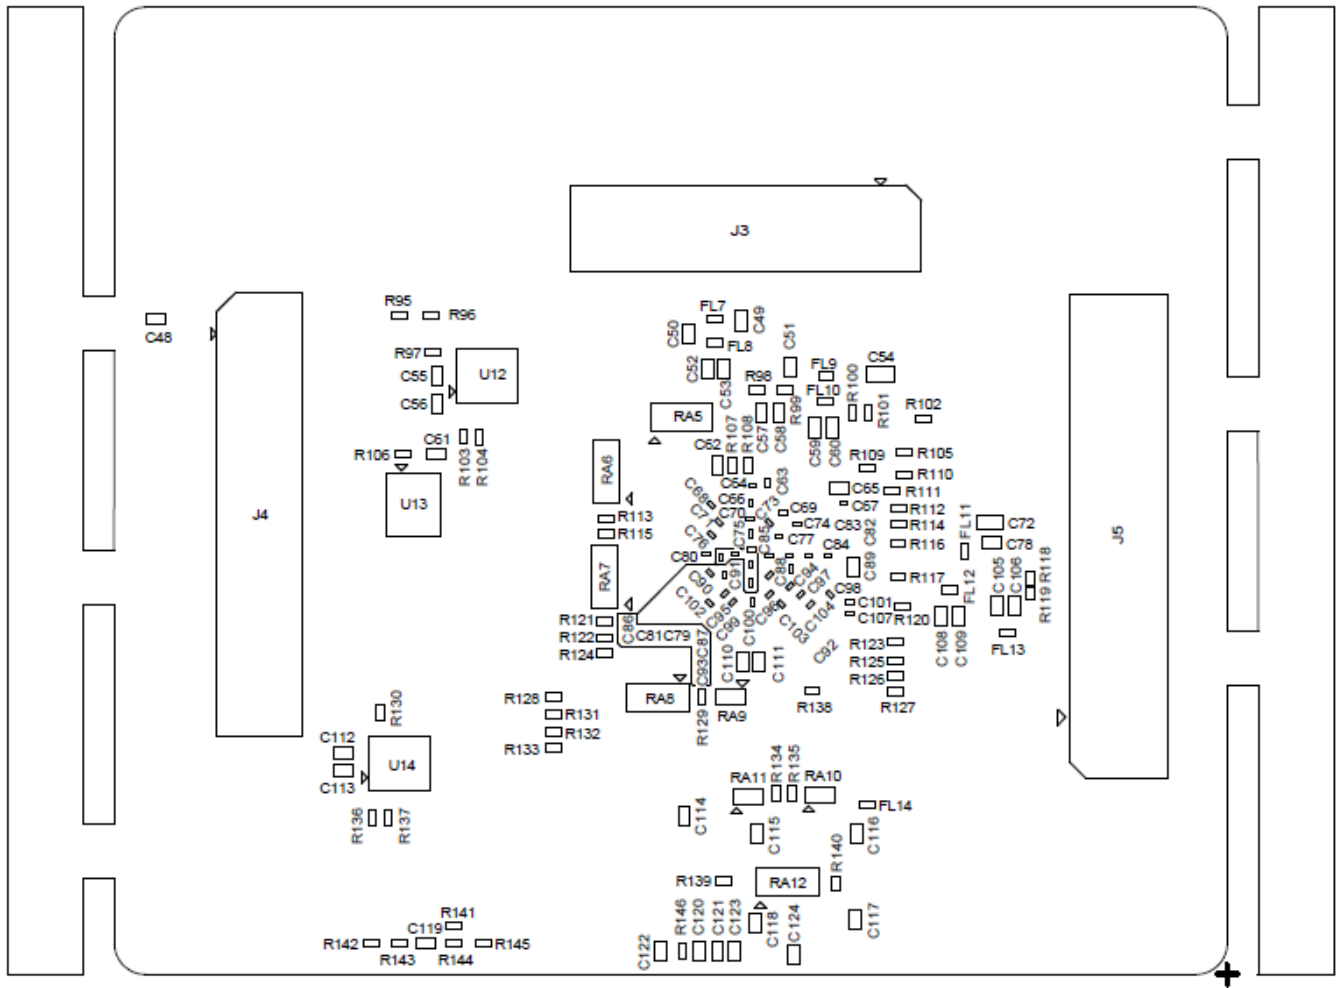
TMDSCSK369 Module Assembly Layout (Bottom)
